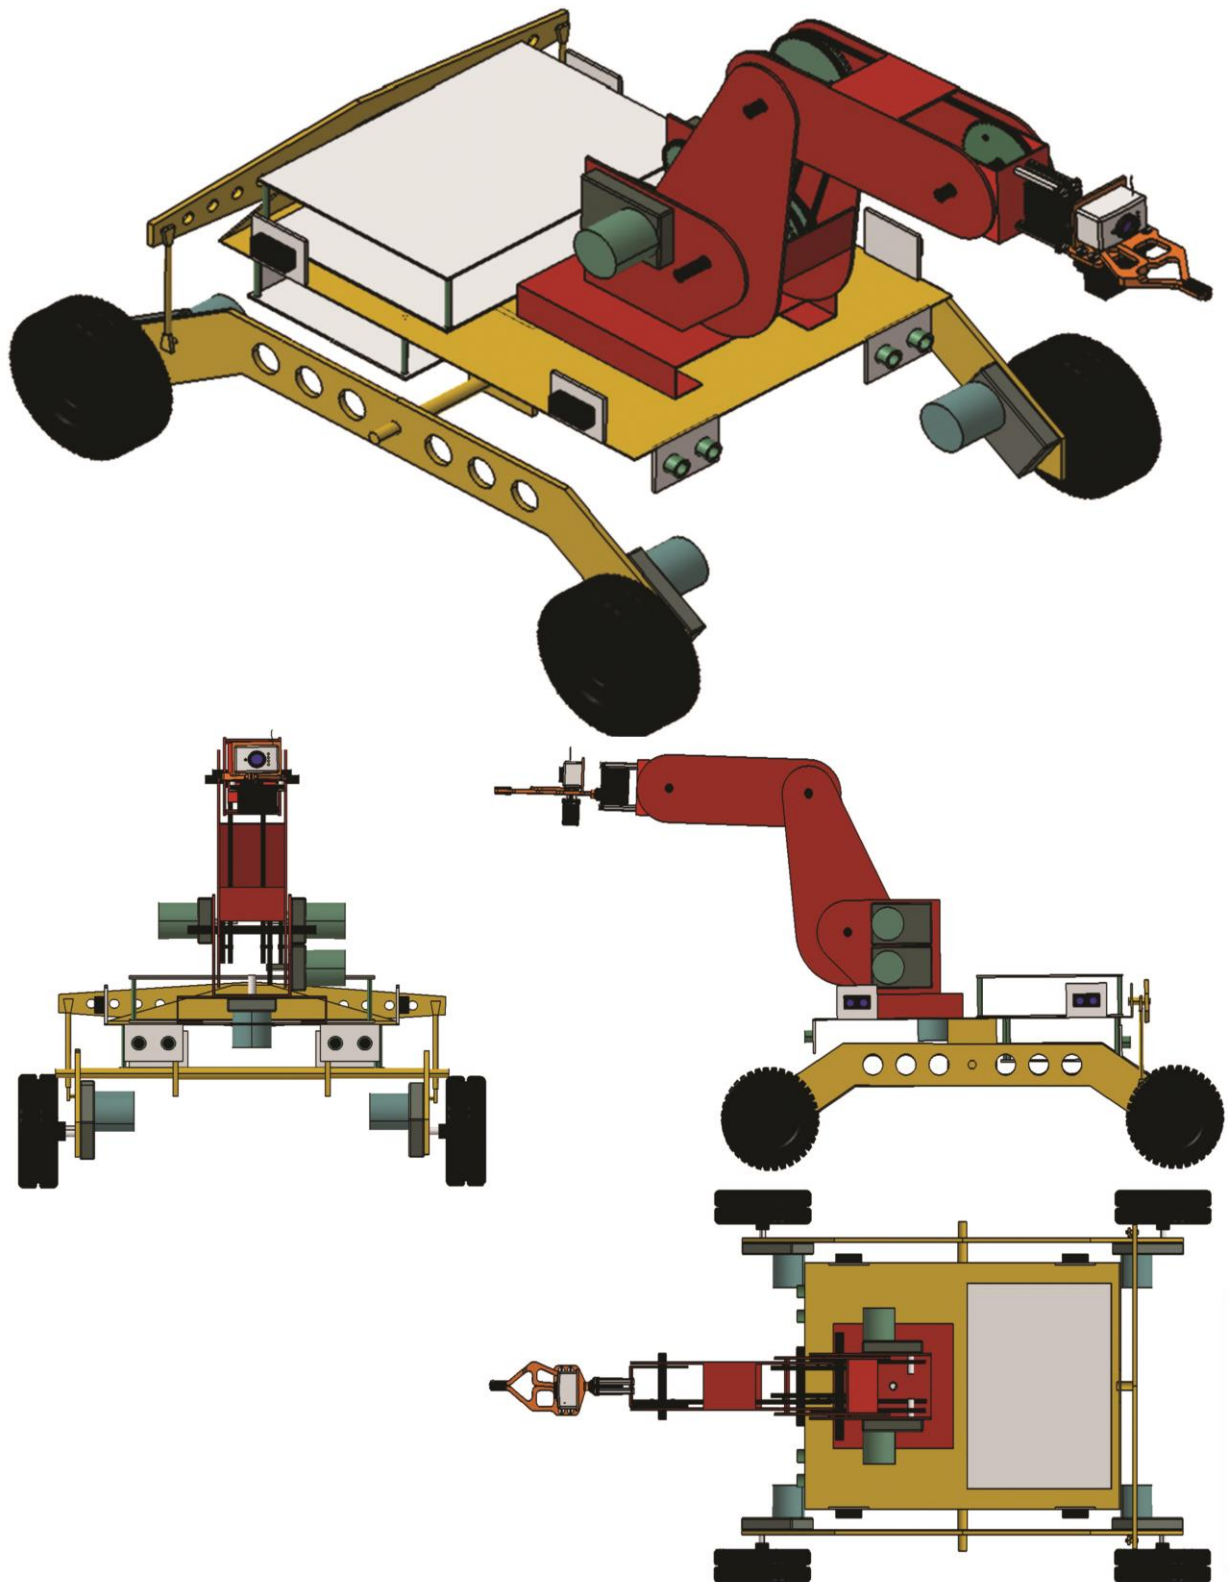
The final concept design of the Mobile Robotic Manipulator
